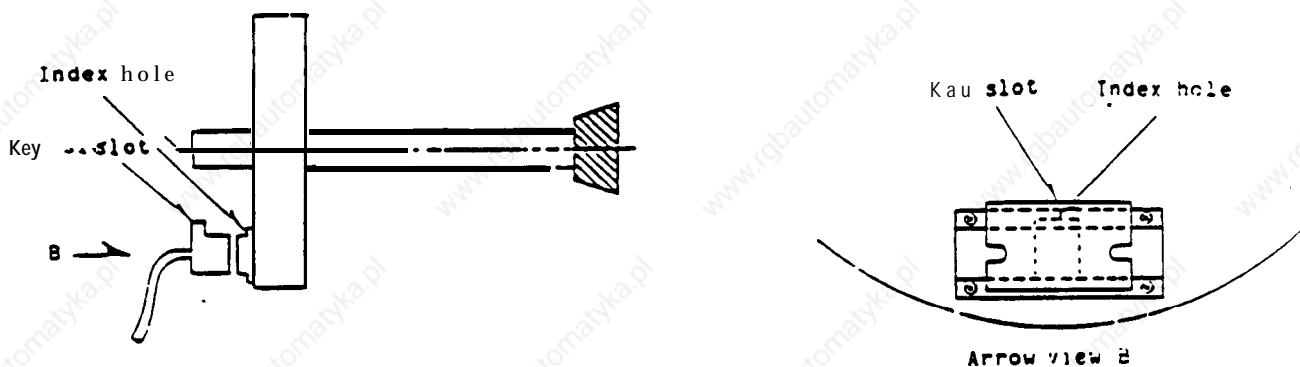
Mounting onto a flat surface on the non-load side of the rotating body
